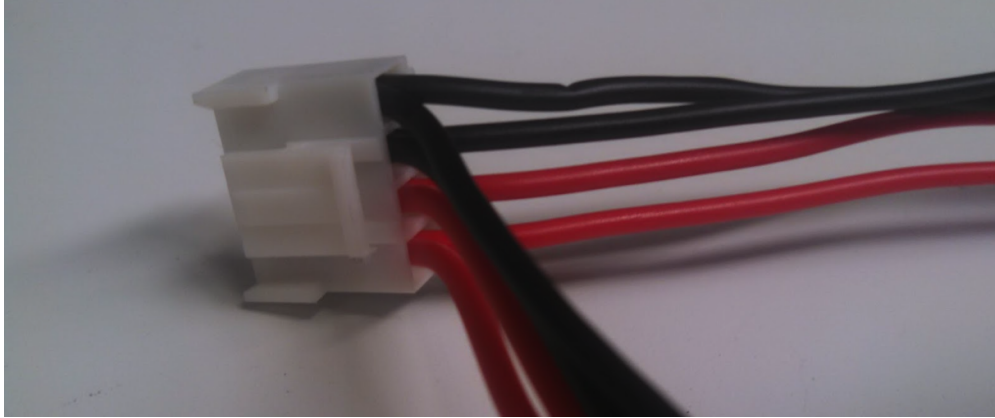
Example of Two 18 AWG Cables Crimped into a Single Pin Used in Supplied LED Panel Cable Assembly
